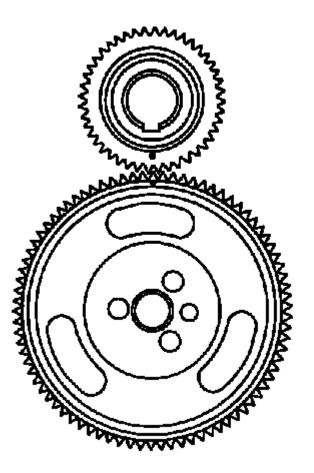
Aligning Balance Shaft Drive Gear & Balance Shaft Driven Gear Courtesy of GENERAL MOTORS CORP.
